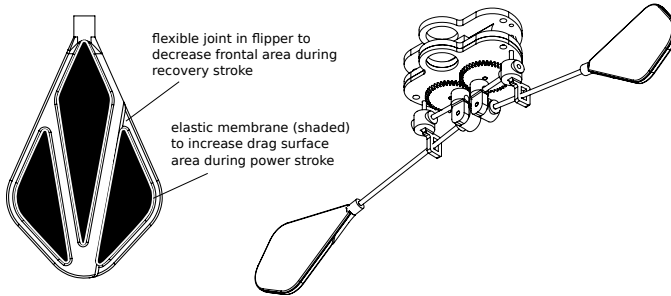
CAD model of motorised rowing mechanism with enlarged detail of paddle
